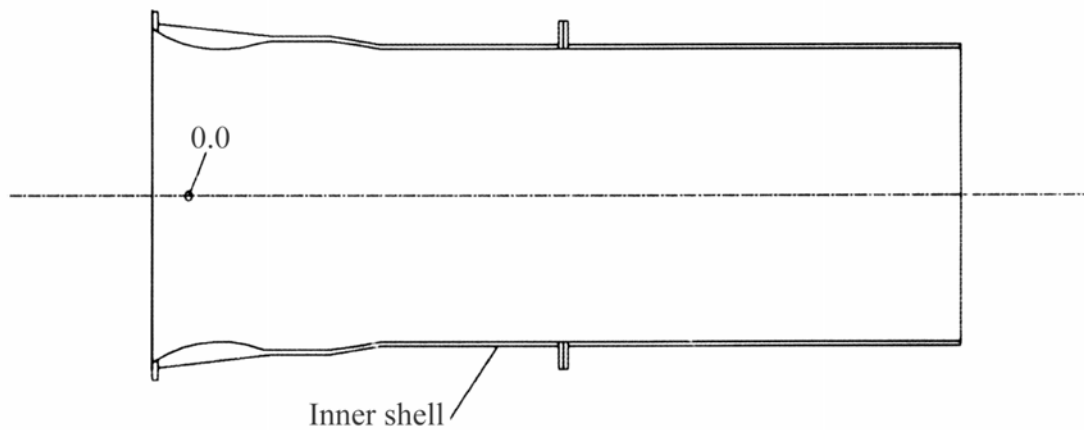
Longitudinal section of exoskeletal engine inner shell.
